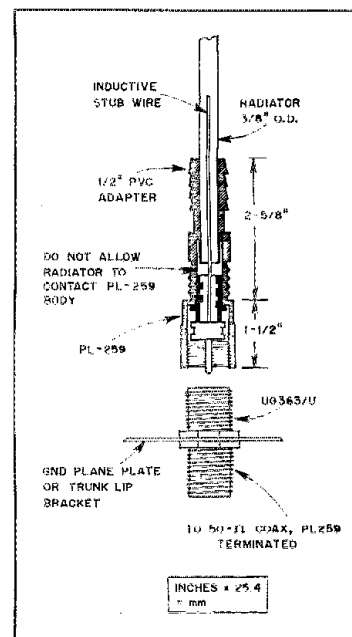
This drawing shows a cutaway view of the antenna assembly. A PVC pipe adapter allows simple and inexpensive construction.
